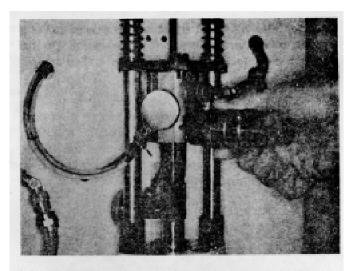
H-56. Assembling the ST-708 Tool to the Adapter Pot
